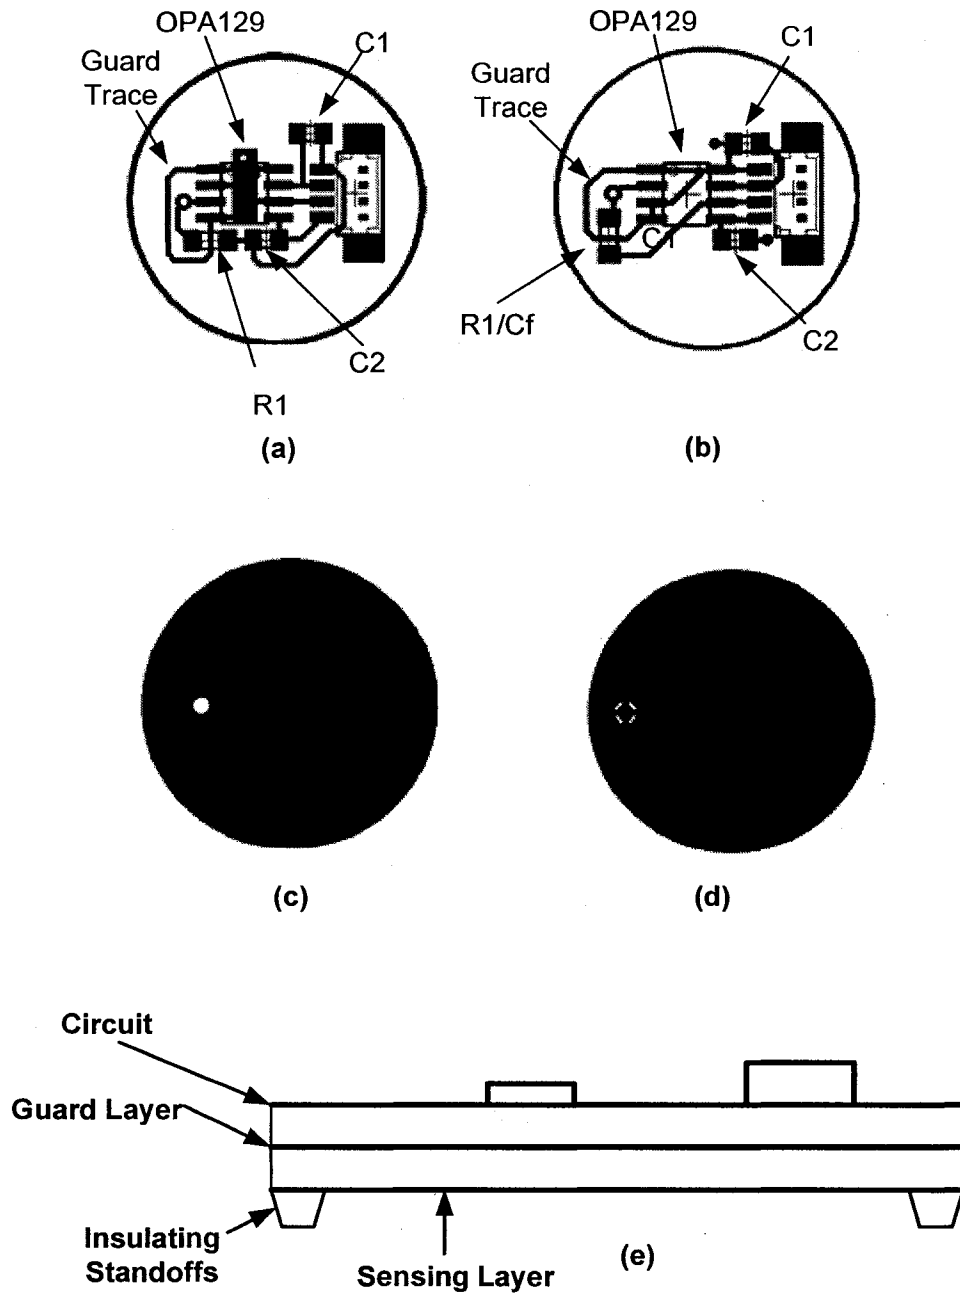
HI and LI Probe Circuit Board Layout (Enlarged for clarity). (a) HI Signal Layer (b) LI Signal Layer (c) Inner guard layer (d) Bottom sensing layer (e) 3 layered probe structure
